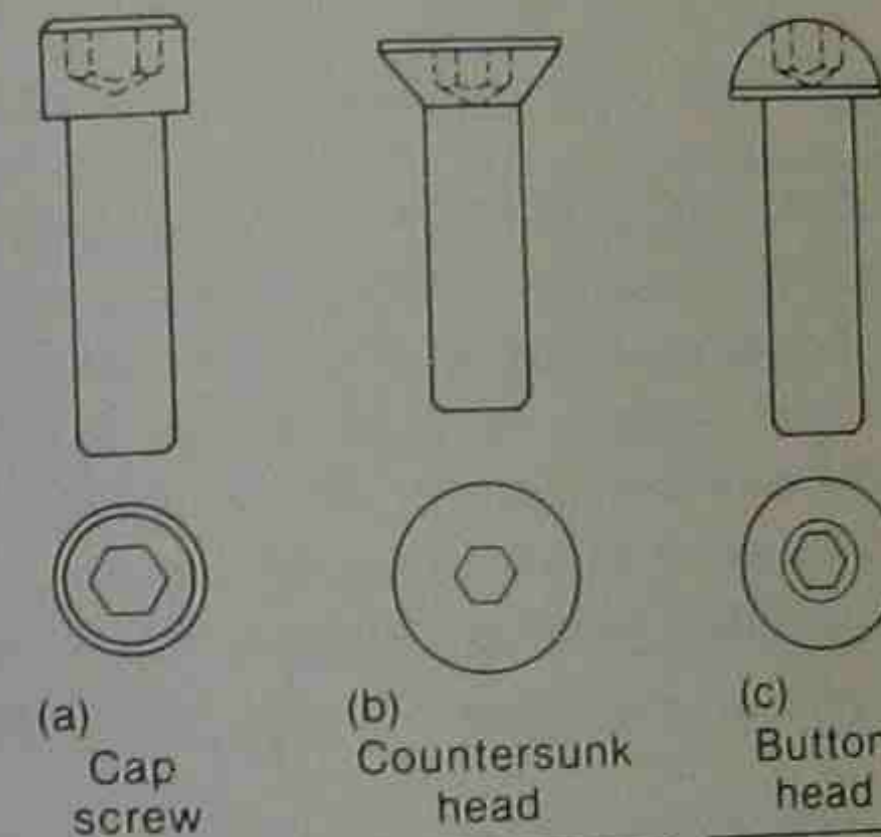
Machine screw socket head styles (a) Cap screw (b) Countersunk head (c) Button head
